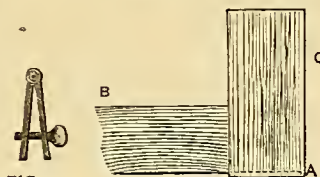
SECTION OF BLOCK SET ON THE MOULD.
